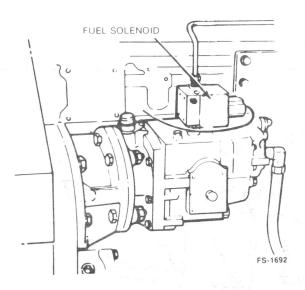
FUEL SOLENOID VALVE LOCATION
